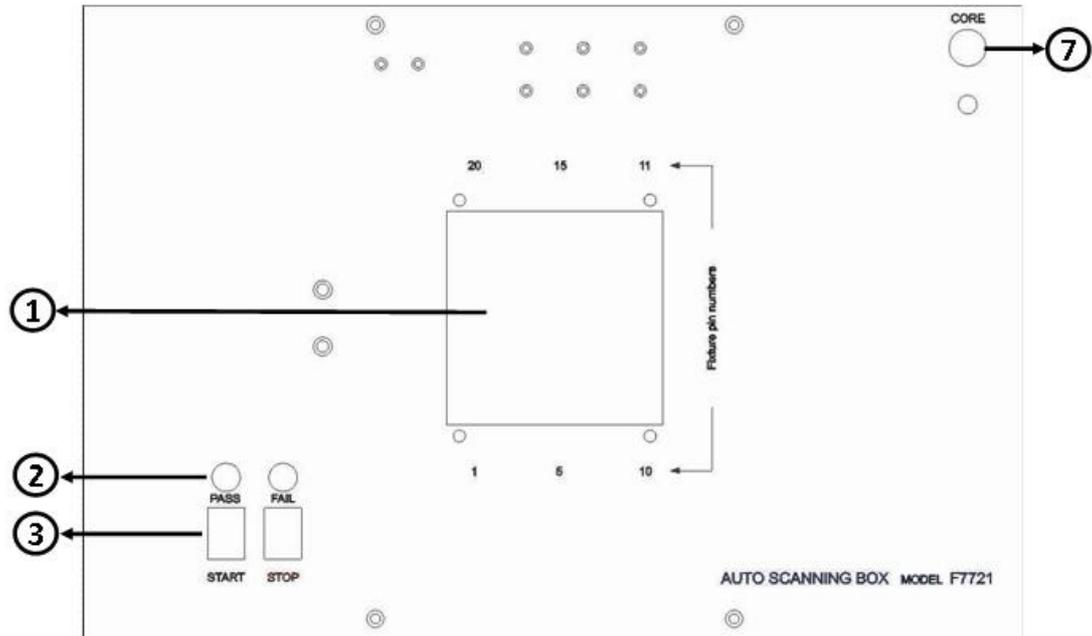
F7721 Transformer Tester Fixture Overlook
